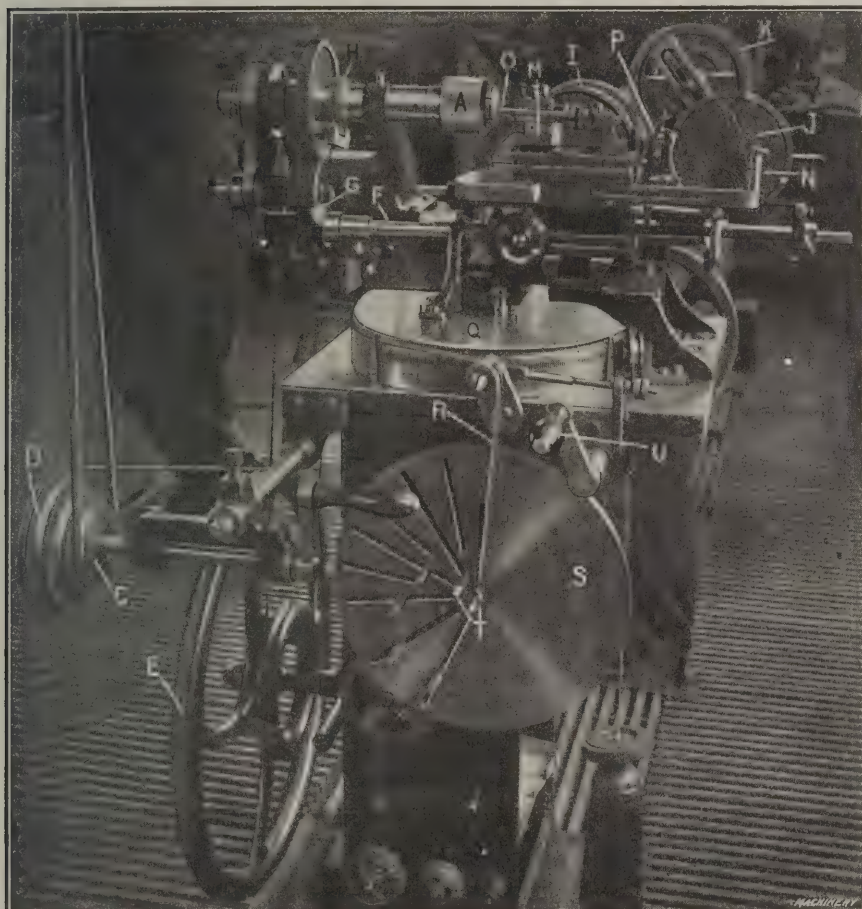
Swiss "Brocade" Machine, which produces Special Designs of Engine Turning
